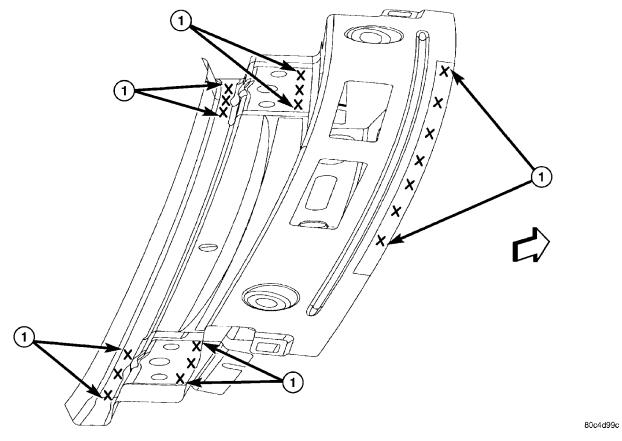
UPPER LIFTGATE TO REINFORCEMENT TO LOWER LIFTGATE ROOF FRAME
